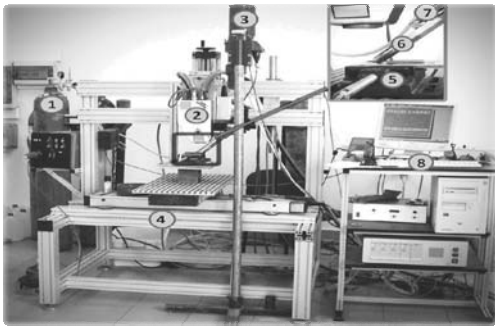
Laser HPDL surfacing experimental CNC stand equipped with diode laser ROFIN SINAR DL 020: 1 - shielding and powder feeding gases containers (argon), 2 - HPDL laser head, 3 - powder feeding system, 4 - CNC positioning control system ISEL AUTOMATION, 5 - fixture of titanium alloy WT3-1 plate to be hardfaced, 6 - powder feeding nozzle of dia 2.0 [mm], 7 - shielding gas nozzle, 8 - stand control system
